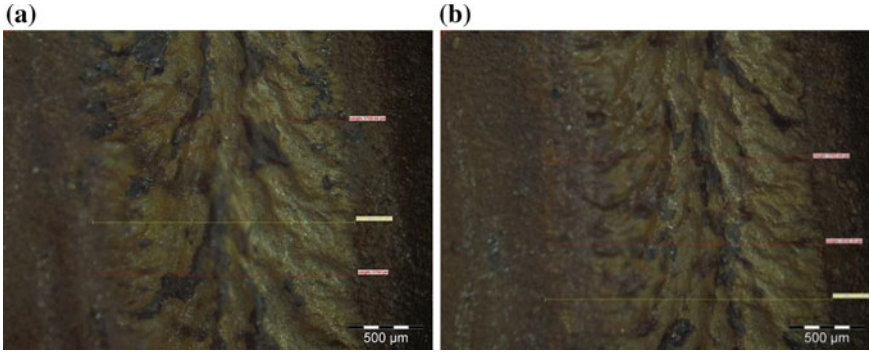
Weld bead at (a) 200 W (b) 250 W laser power and 120 mm/min welding speed
